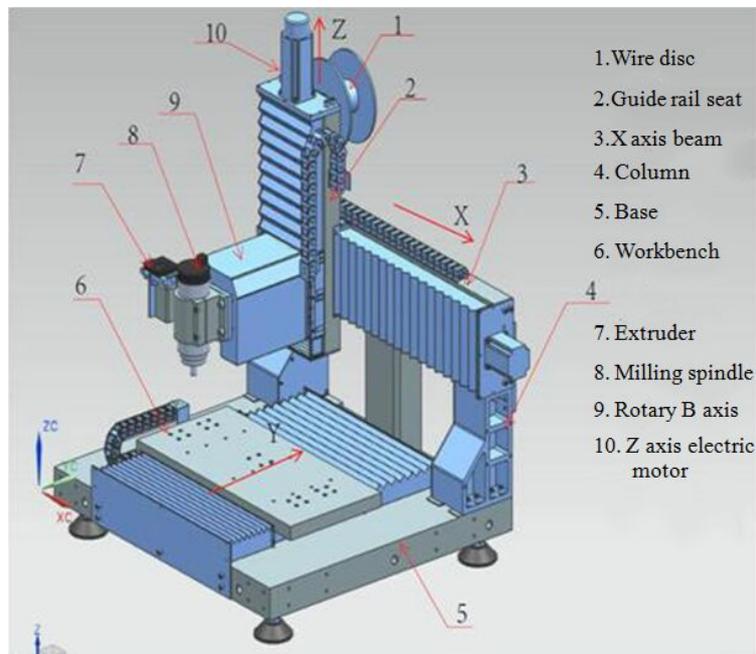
The miniaturized machine tool designed with combined FDM and milling capabilities
